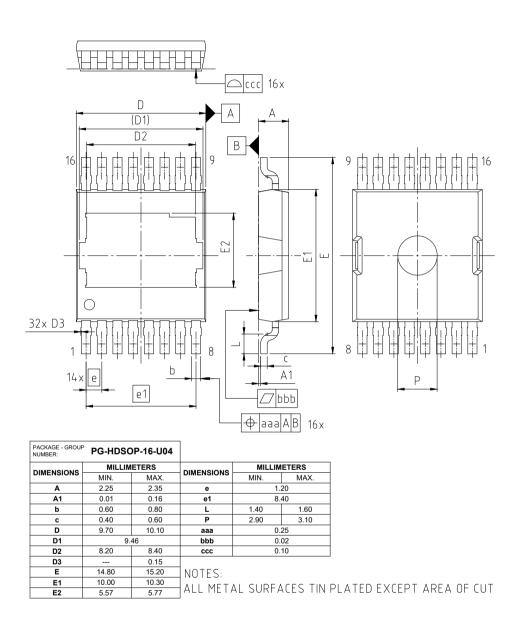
Outline PG-HDSOP-16, dimensions in mm
